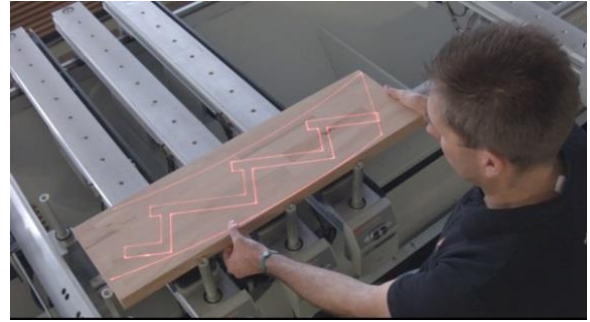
Placing and fixing parts into CNC machine for the production [5]
